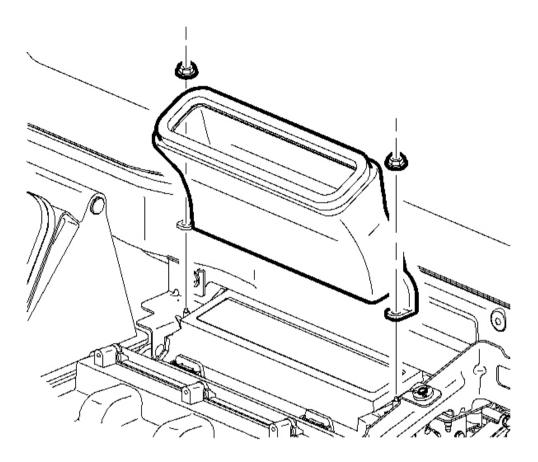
Center I/P Air Outlet Duct & Retainers Courtesy of GENERAL MOTORS CORP.
